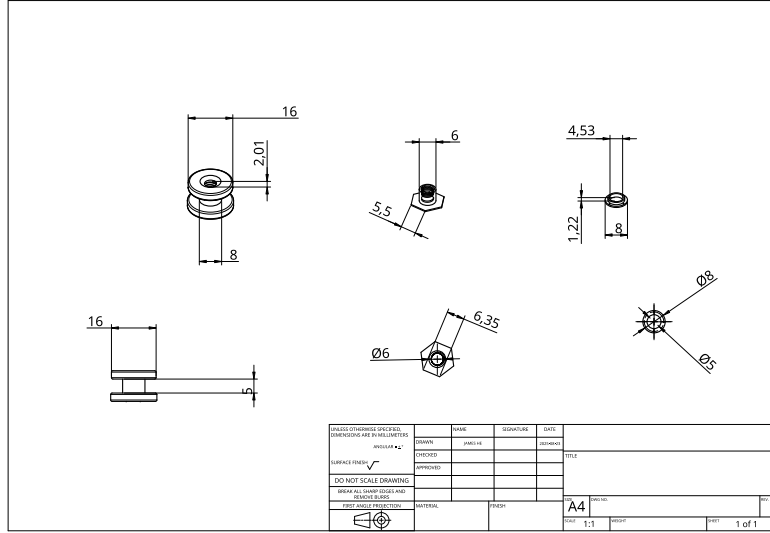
A4 engineering drawing of the rail guide assembly from Onshape.
